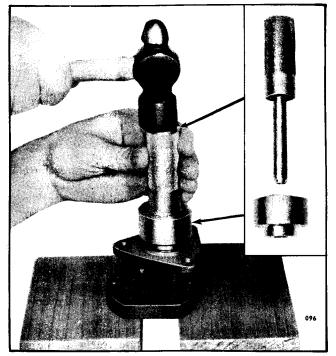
Installing Outer Oil Seal using Tools J 1508-8 and J 1508-9
